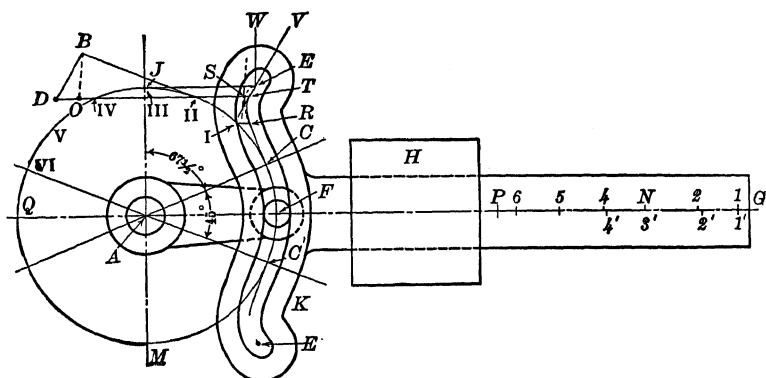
(Duplicate) CAM SURFACE ON RECIPROCATING FOLLOWER ROD
